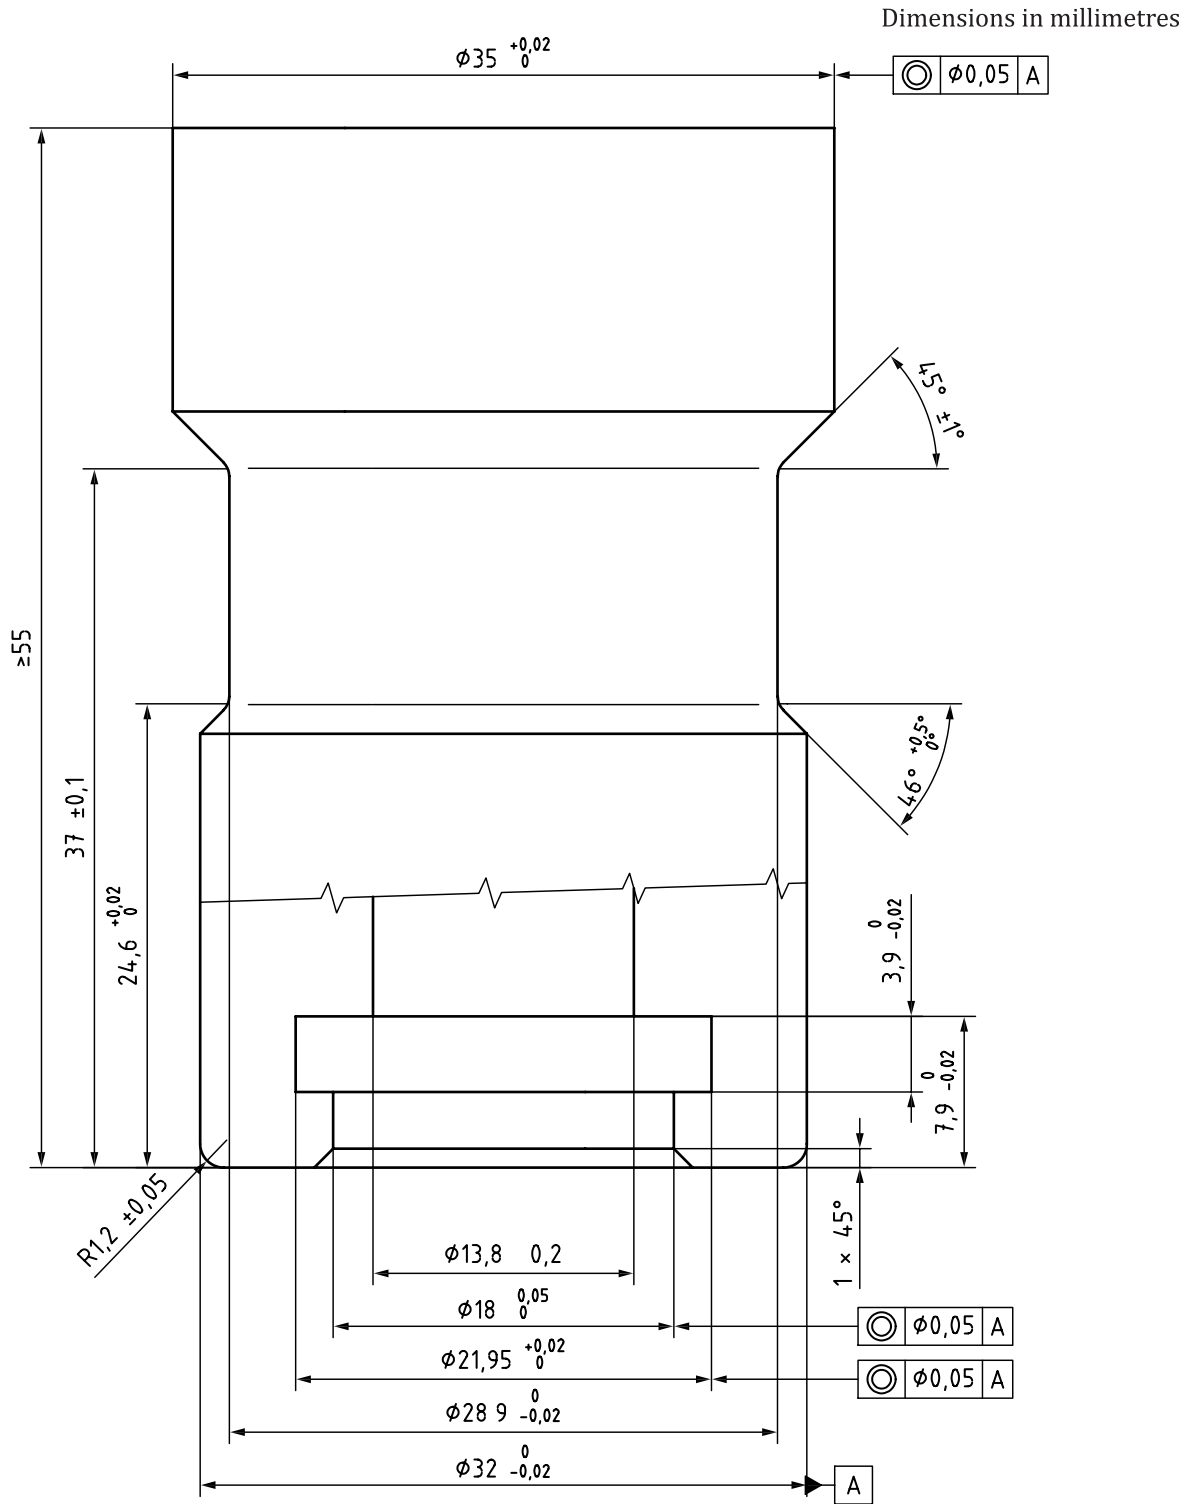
C200 - "Tight fit" tolerances
